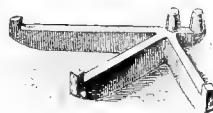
Circulating Drum for Baker's Improved Two-Coil Fire-Proof Heater.
